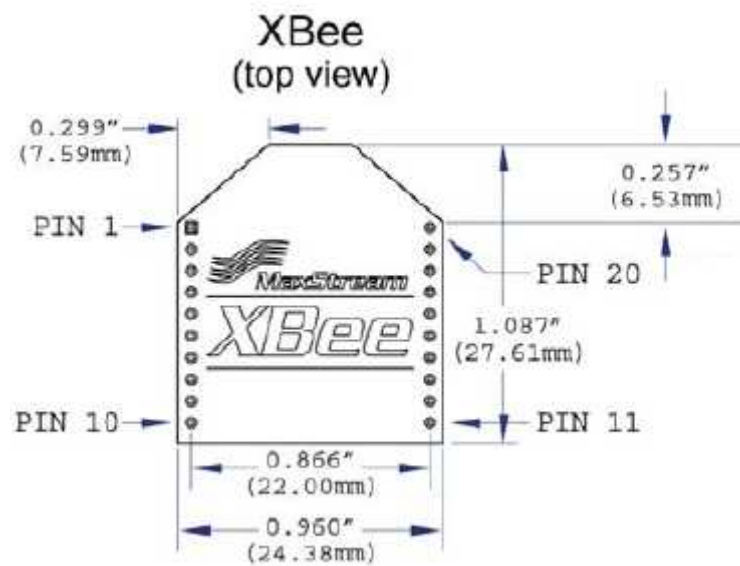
Mechanical Drawing of the Module [19]
